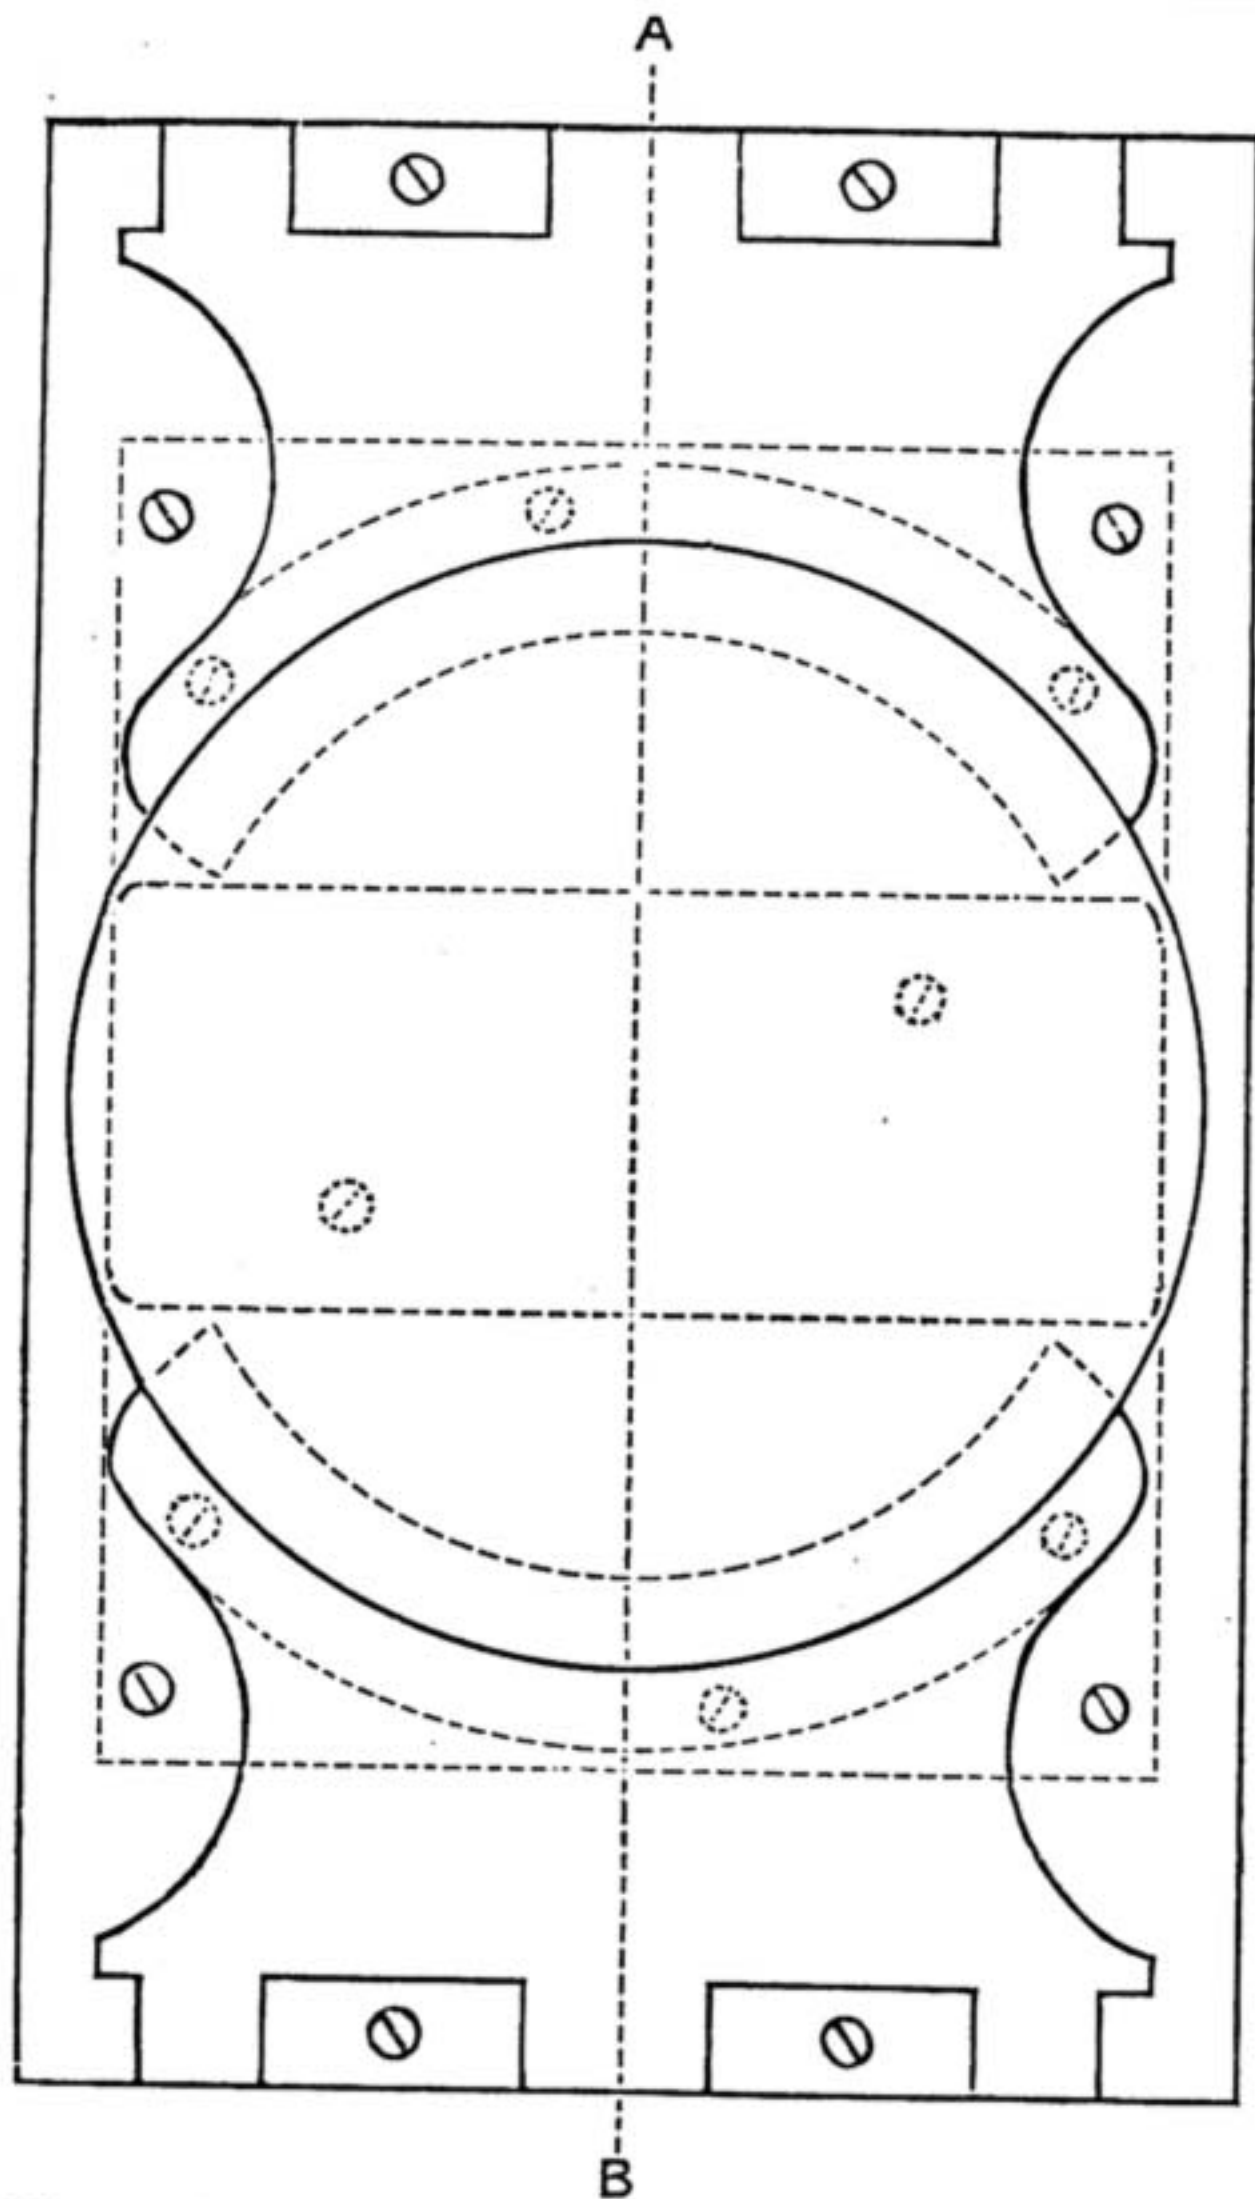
Diagram showing Method of Mounting Uprights and Segments in Lathe for turning them out of Solid Piece.
